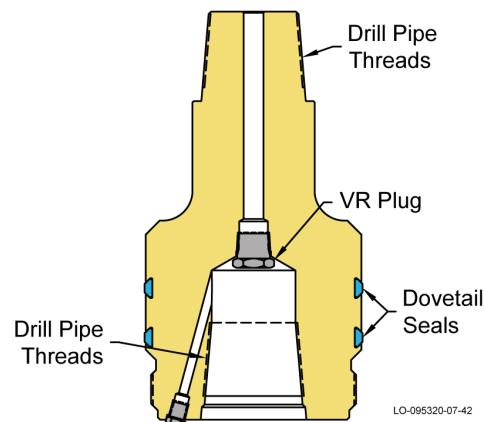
Combination Tool (Wear Bushing Running Tool Configuration)
